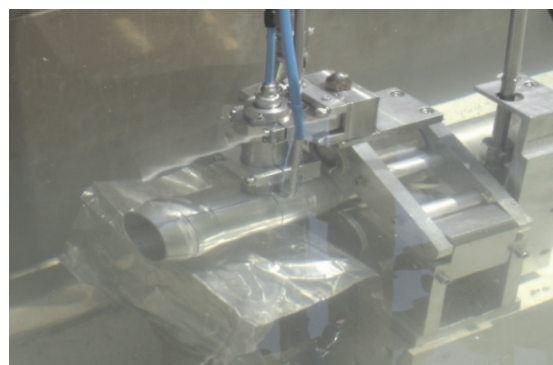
View of laser cutting fixture and mock set-up for underwater water-jet assisted laser cutting.
